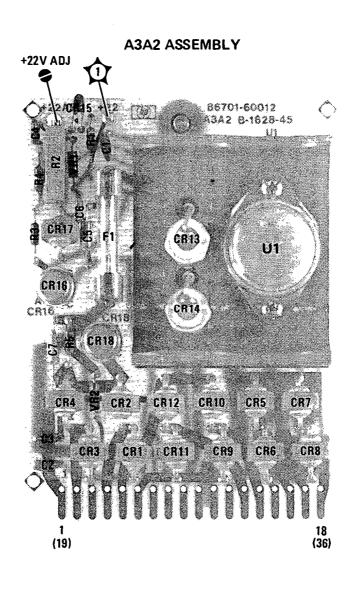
A3A2 Rectifier Assembly Component and Test Point Locations
